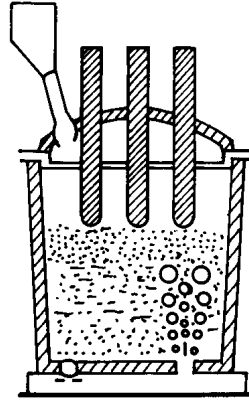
Schematic illustration of the ladle furnace. The equipment consists of three graphite electrodes which electrically reheat the molten steel in the ladle. Argon gas is injected from the bottom to ensure thermal transfer and alloying addition can be made through the top lid³⁴.
